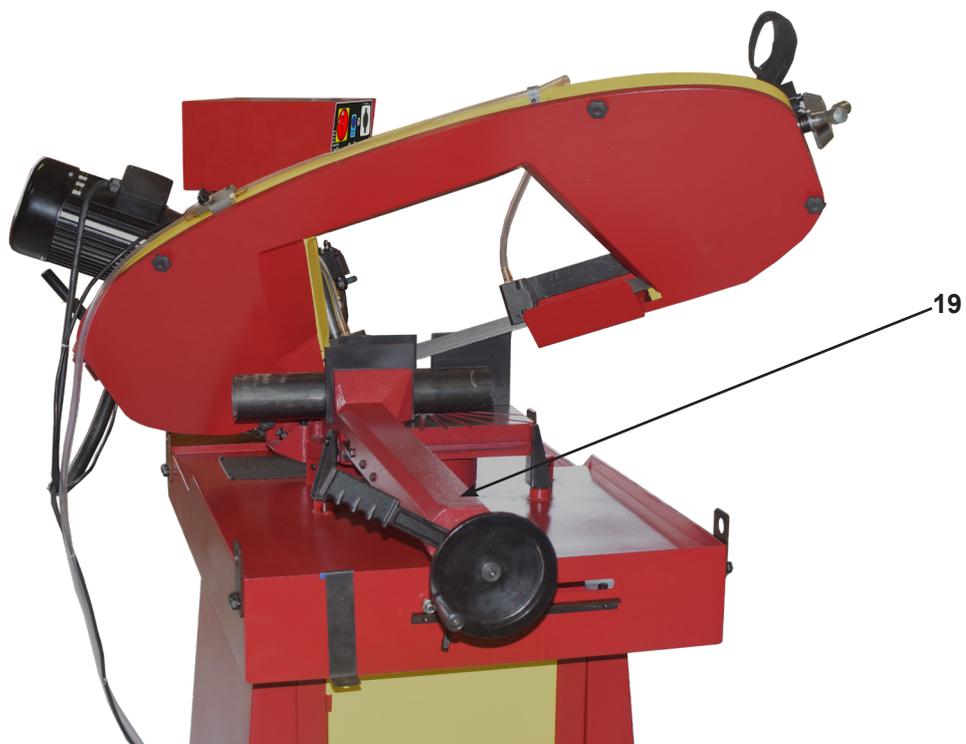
VISE SET (19) TO THE RIGHT
